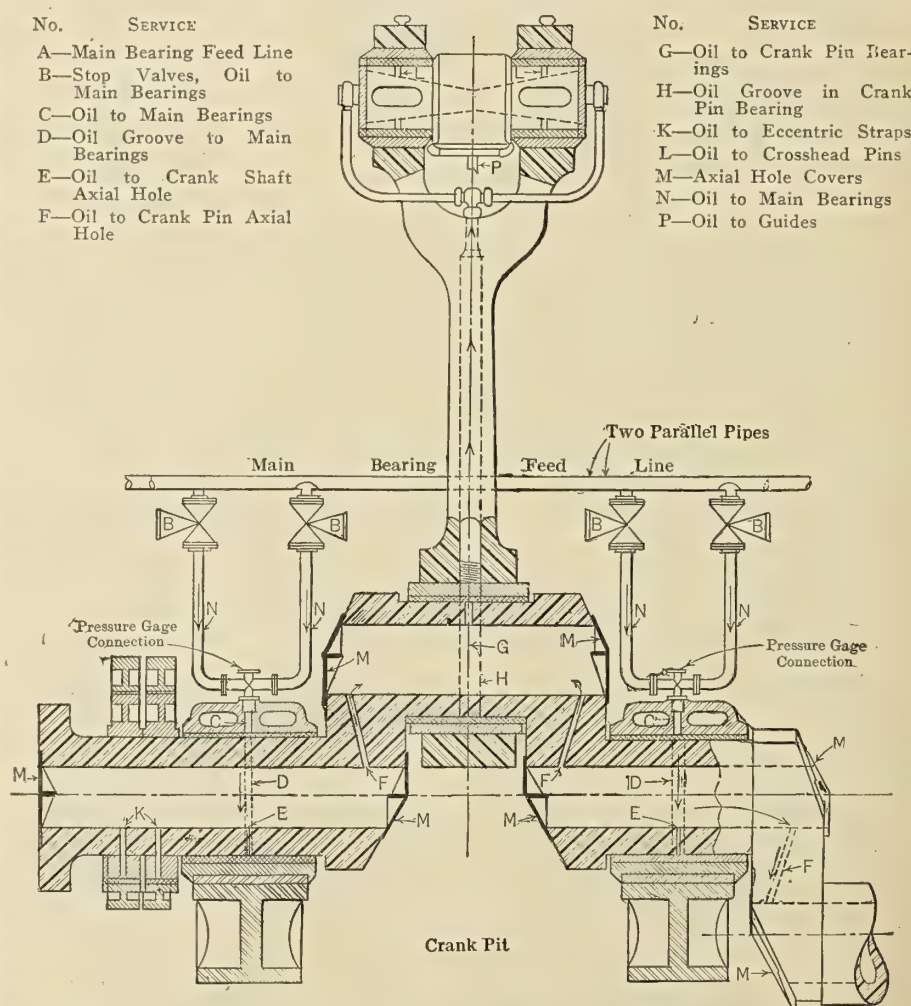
Diagram Showing Forced Lubrication Connections for Connecting Rod and Crankshaft of Main Engine
